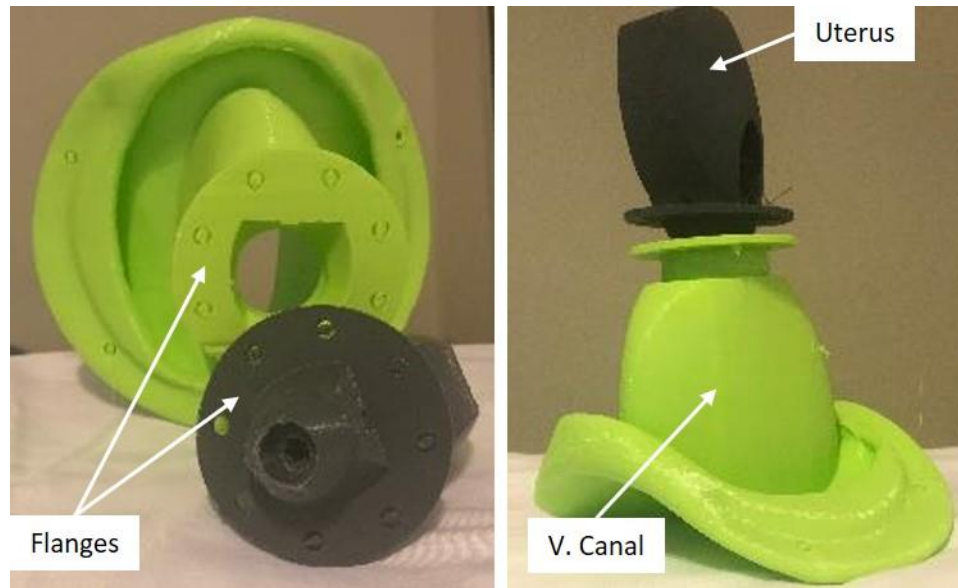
3D Printed (in rigid material) Pelvic piece and Uterus showing flange lock mechanism.
